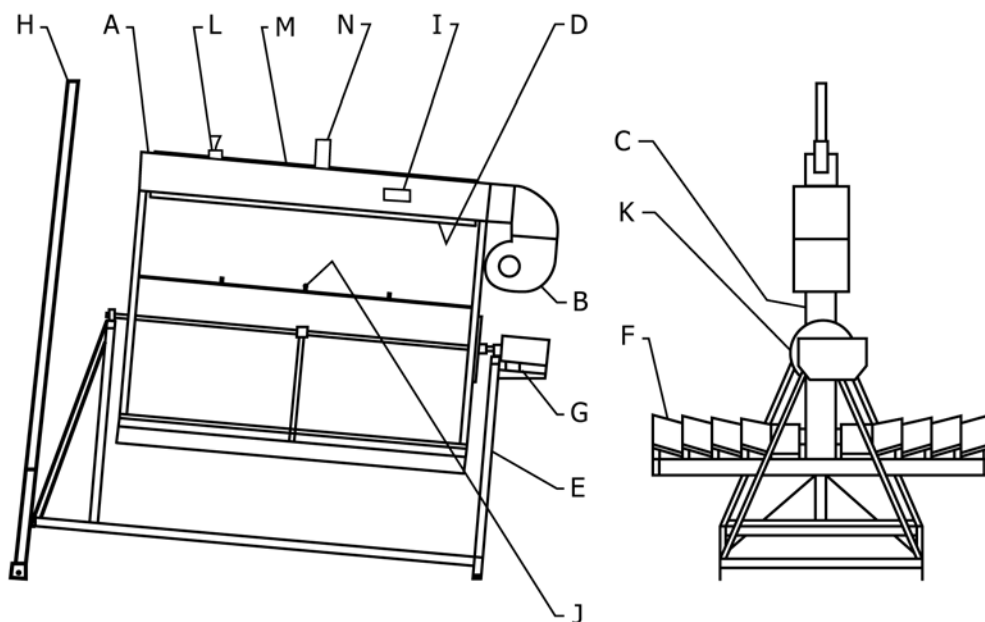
Schematic of a Fresnel-Reflecting Concentrator-Accelerated Weathering Machine Single Axis Tracking
